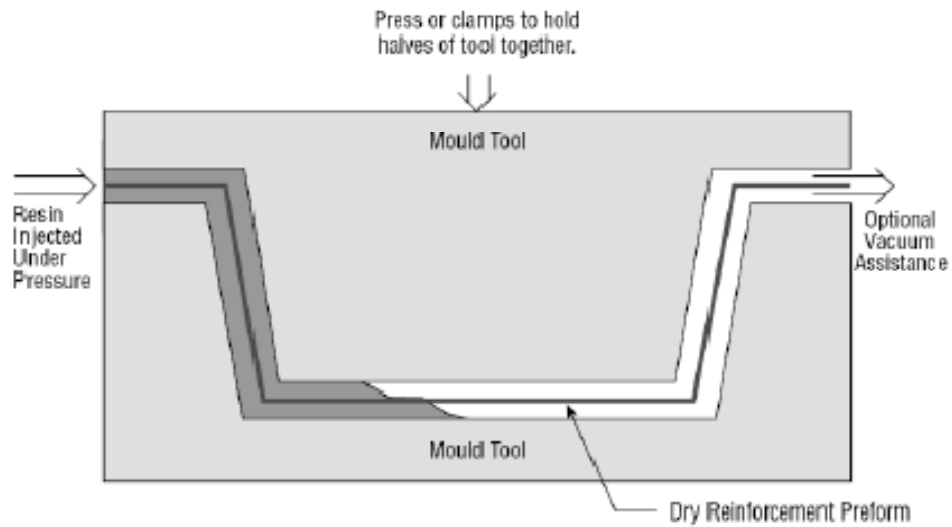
Schematic view of Resin Transfer Molding process [23]
